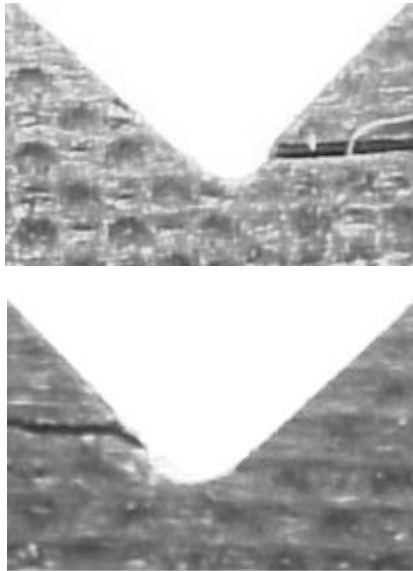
Photo images showing first and second cracks at notch roots for the 0° specimen.
